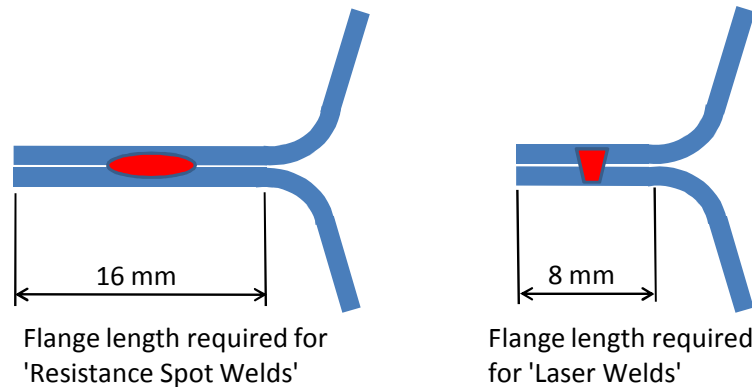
Weld flange comparison spot weld vs. laser weld
